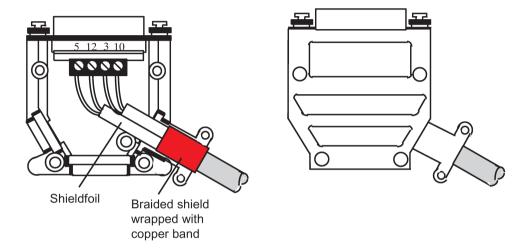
15-pin D-sub plug fitted to the standard cable
